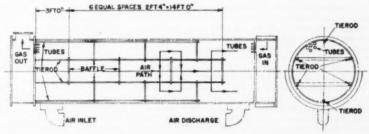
CROSS SECTION OF 5000-KW GAS-TURBINE REGENERATOR
